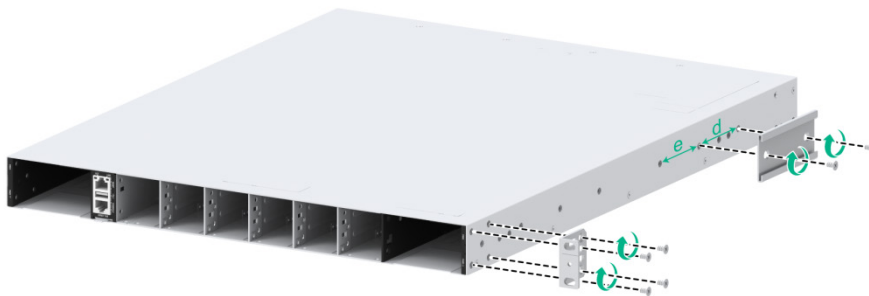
Attaching the mounting brackets and chassis rails to the S9855-40B switch (power supply-side mounting position for the mounting brackets)
